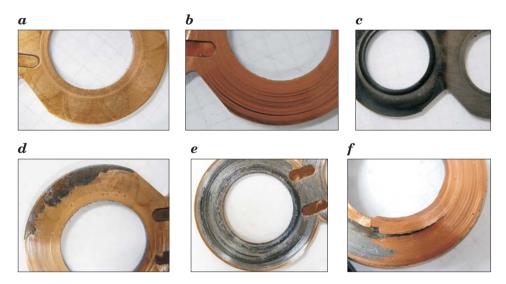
Resistance filler seals failures: a – resistance filler scratches under 16  $\mu$ m, b – scratches over 16  $\mu$ m, c – resistance filler scorch, d – torn filler surface off, e – seized surface of the resistance filler, f – copper coating defect
